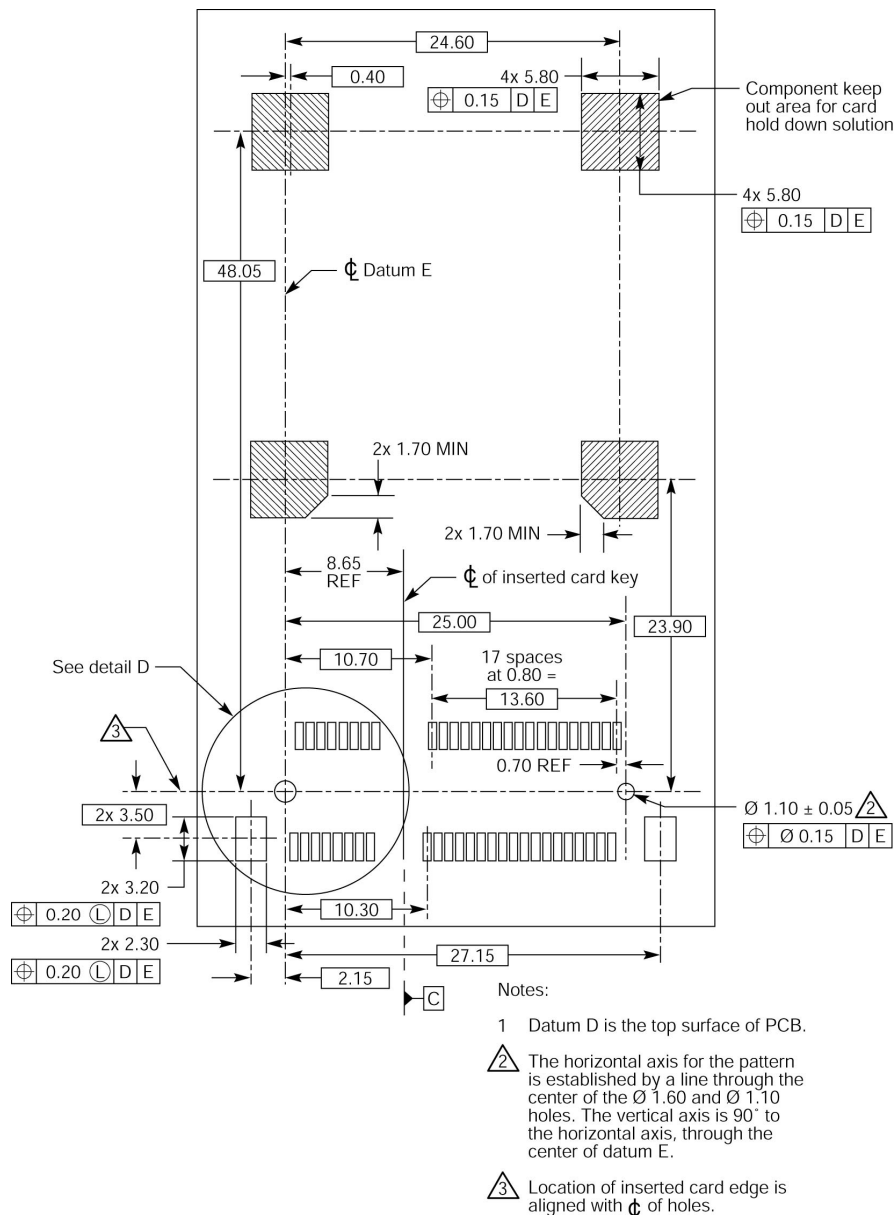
Recommended System Board Layout for Dual-Use Socket
